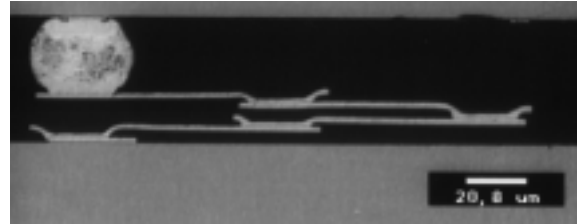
Cross section through the solder balls and the four layer metallization (Cu/BCB)
